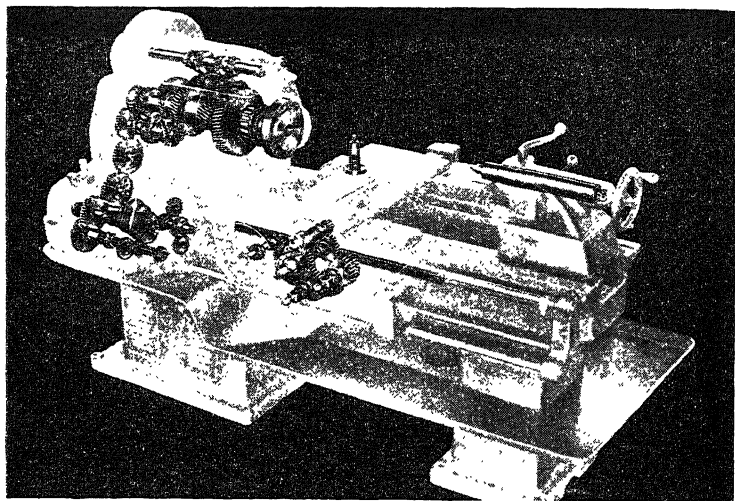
Phantom view of a modern lathe. The parts shown in black are of special alloy steels, heat treated. These parts include the main spindle; the tailstock spindle; all gears, studs, and shafts in the headstock, quick-change gearbox and apron; the feed rack and the feed-rack pinion. (Courtesy of the Monarch Machine Tool Company.)
